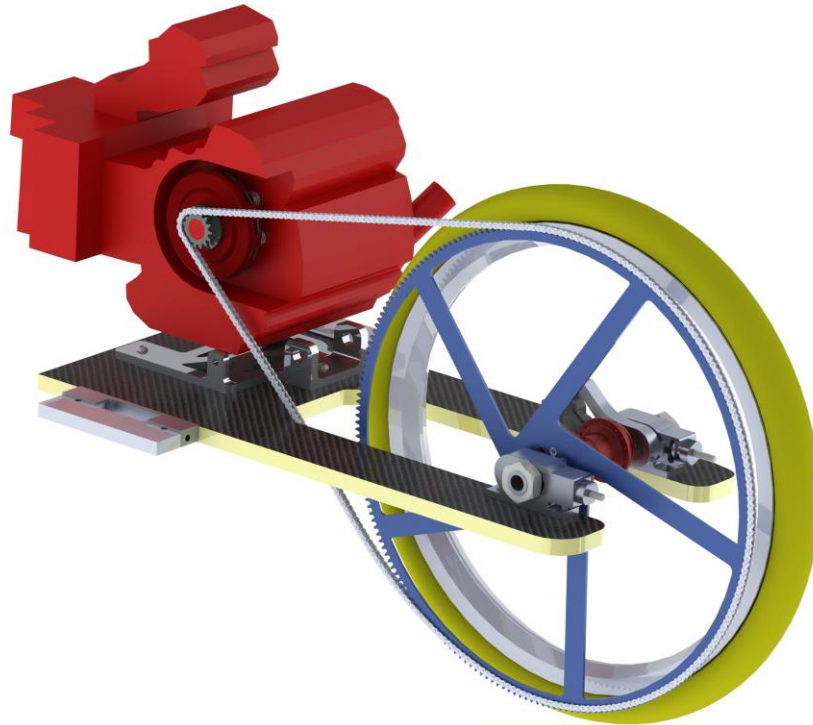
Cal Poly Supermileage Drivetrain Assembly final design
